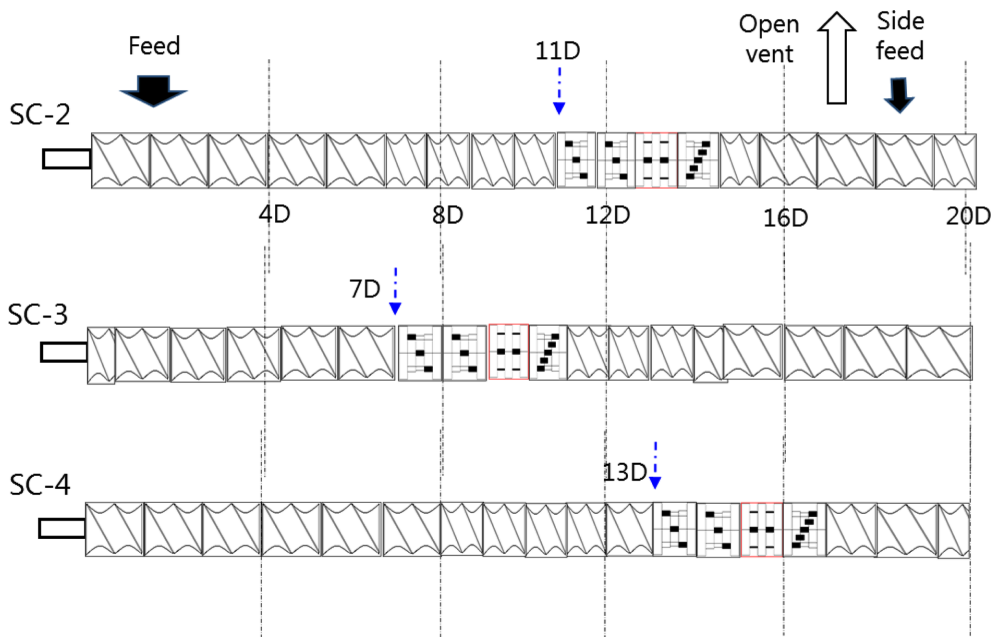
Screw configuration at the feed section of an intermeshing co-rotating twin screw extruder.
